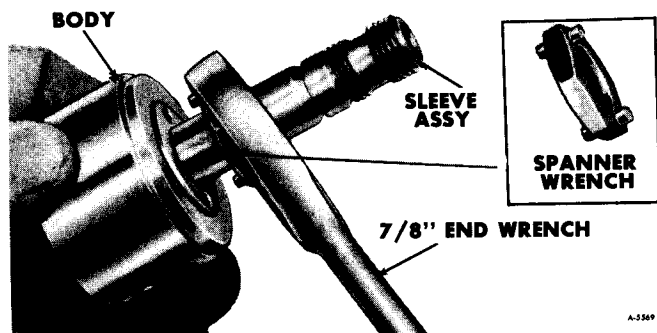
Removing or Replacing Sleeve With Special Tool (Spanner Wrench — Skinner # V0233)
